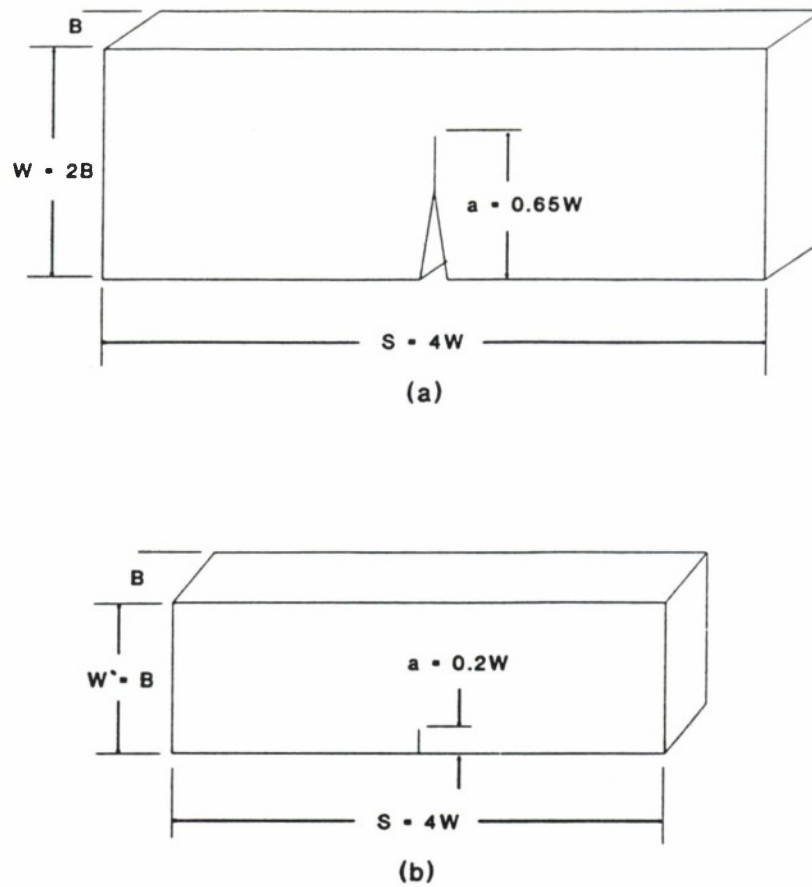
SE(B) specimens; (a) deep crack; (b) shallow crack.
